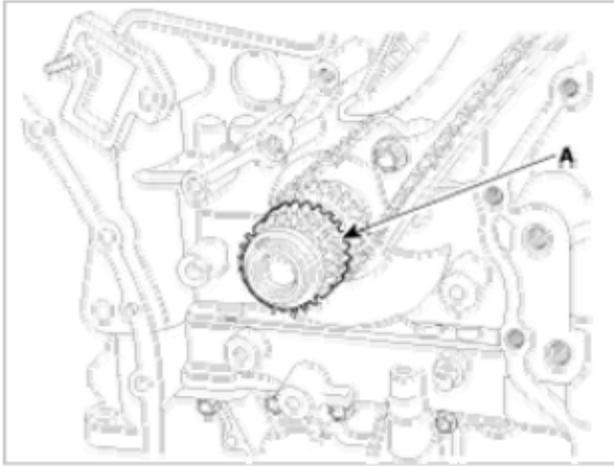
Locating Crankshaft Sprocket (Oil Pump & RH Camshaft Drive)
